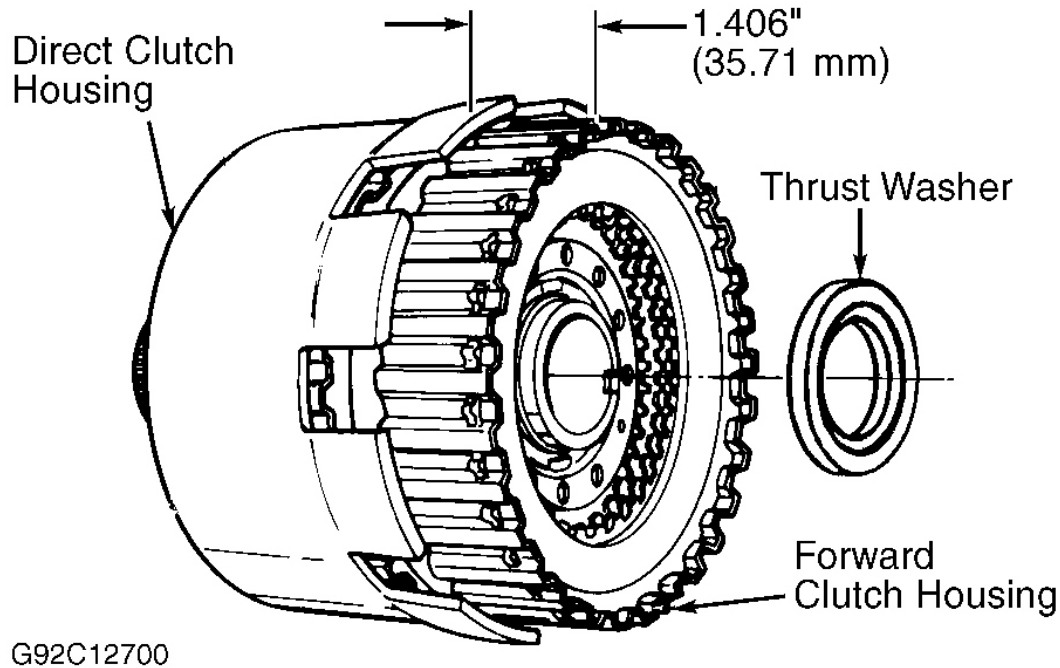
Measuring Forward Clutch-to-Direct Clutch Height
